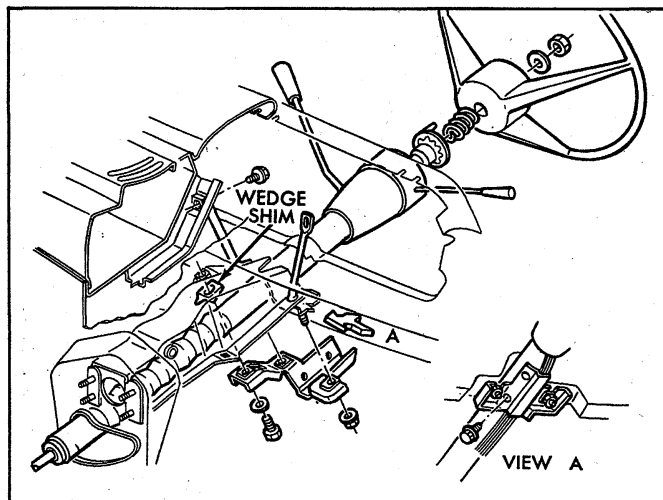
Instrument Panel Mounting Bracket—Chevelle
